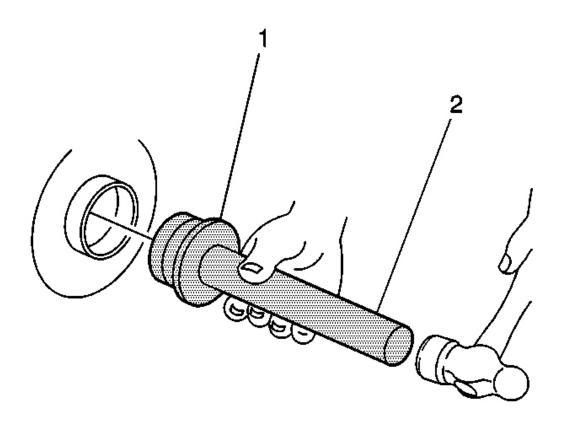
Installing The Axle Shaft Bearing Using J 23690 Or J 29709 & J 8092 Courtesy of GENERAL MOTORS CORP.
